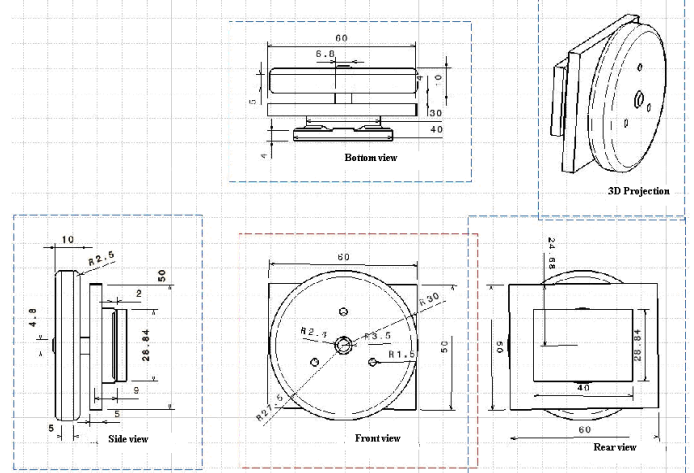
The assembly composed of wheel, engine and engine support (quotes and 3D Projection)
